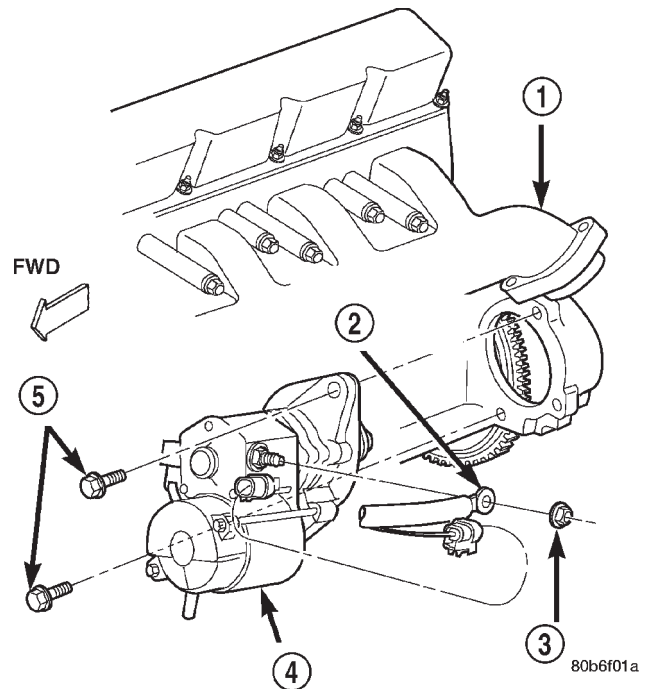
Starter Motor Remove/Install - 8.0L Gasoline Engine
